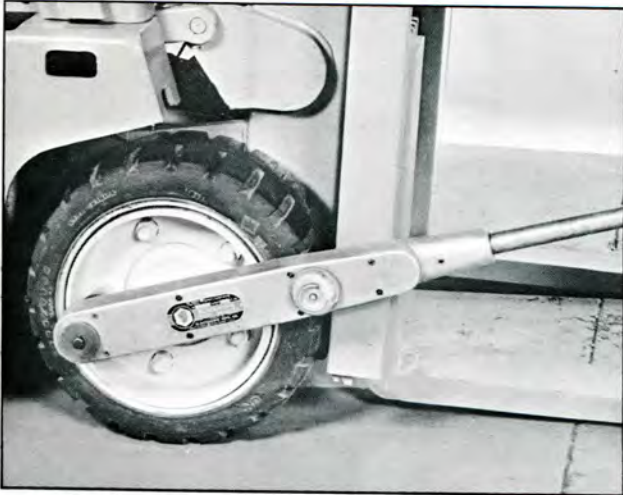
Typical Drive Wheel Lug Nuts Torque
